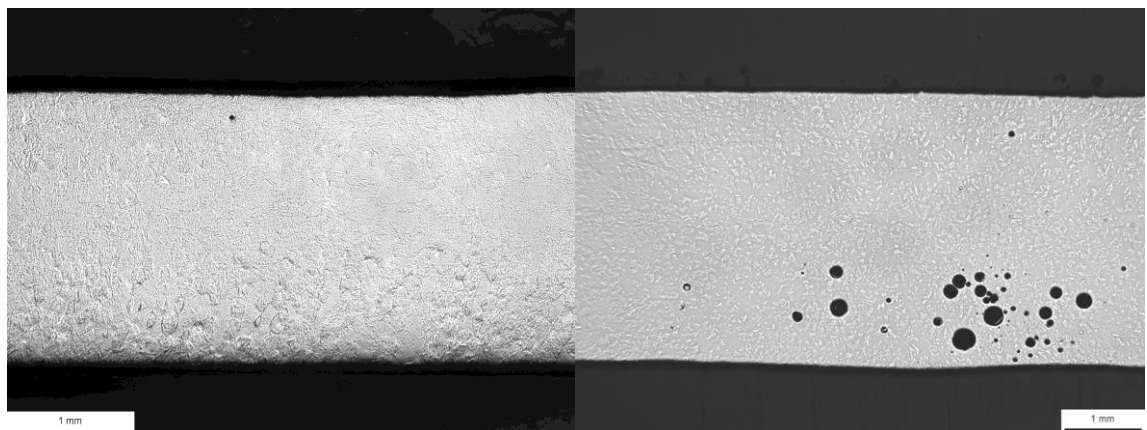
Longitudinal sections of a low porosity weld (4W26, left) and a high porosity weld (4W24, right), showing how the porosity is predominantly located in the bottom half-thickness of the weld metal of weld 4W24.
